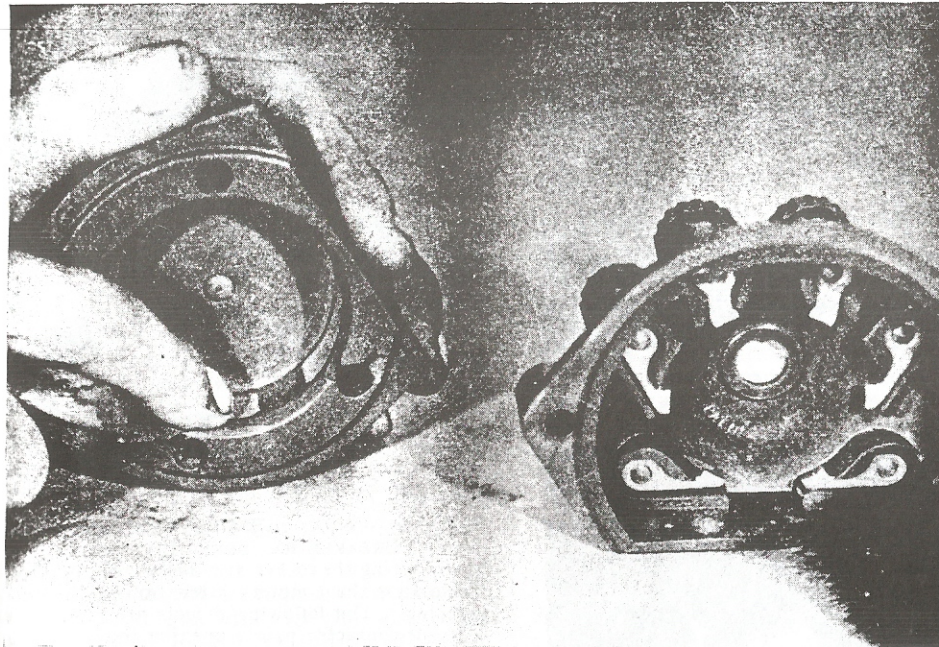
TWO TYPES OF DISTRIBUTORS ARE IN GENERAL USE IN MAGNETO IGNITION, THE JUMP AND BRUSH WIPE.
